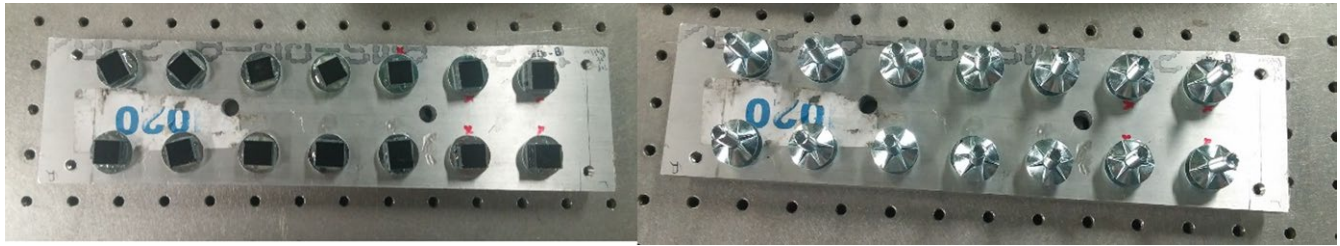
Photo of assembly of test structures. Samples were fixed in the load frame using grips designed for holding rods. The threading of the bolts helps to aid in securing the test structures
